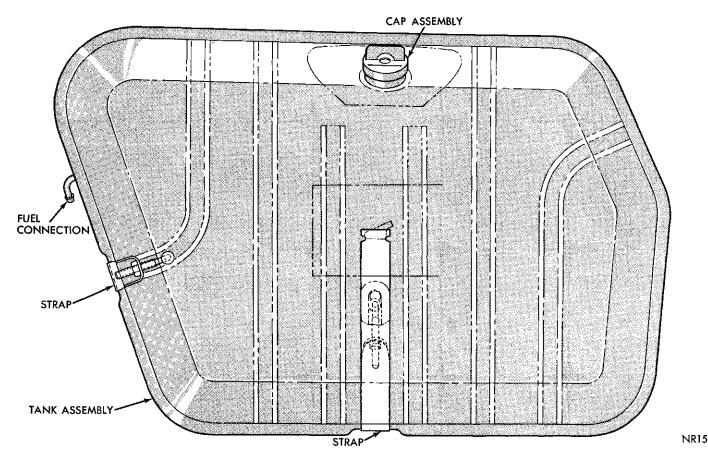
Fuel Tank Assembly (121.5 inch W/B Vehicles)
